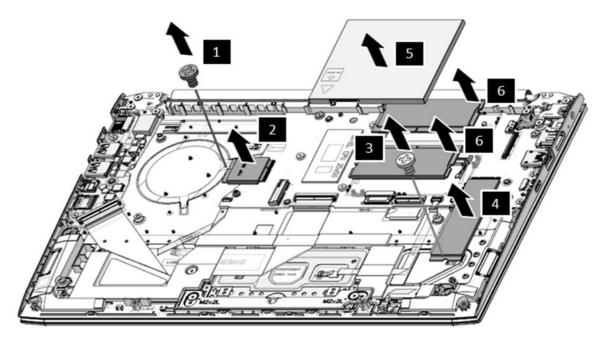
Removing the SSD Card/WLAN Card/DIMM
